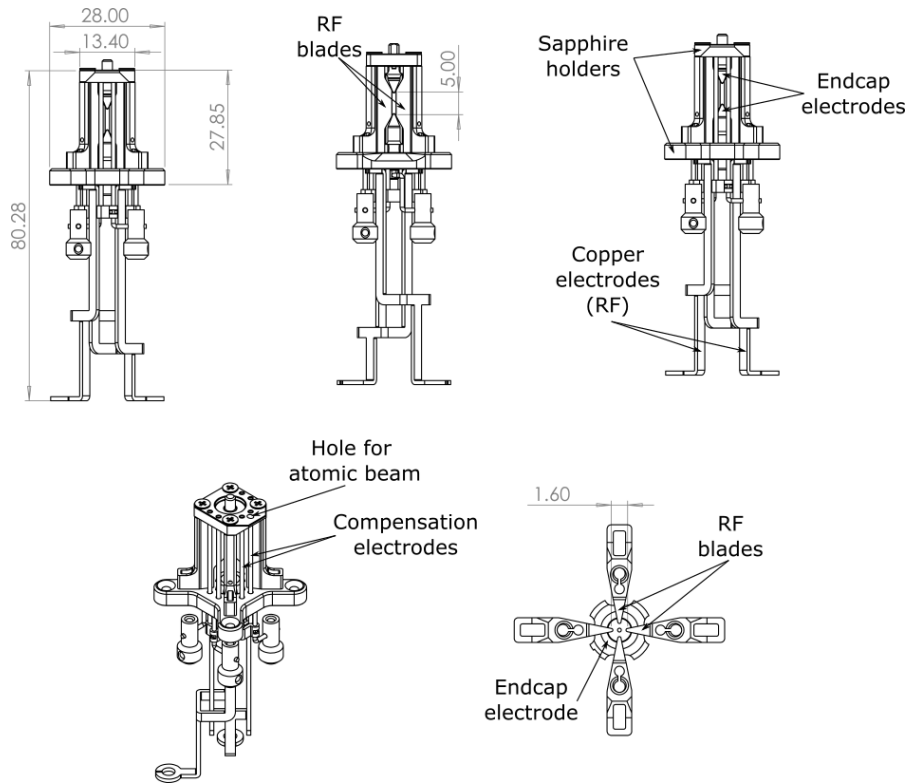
Different views of the ion trap assembly. The top three panels show the trap in an axial view (vertical direction) with significant dimensions labeled in mm. The bottom right panel shows a cut of the trap in the radial plane.
